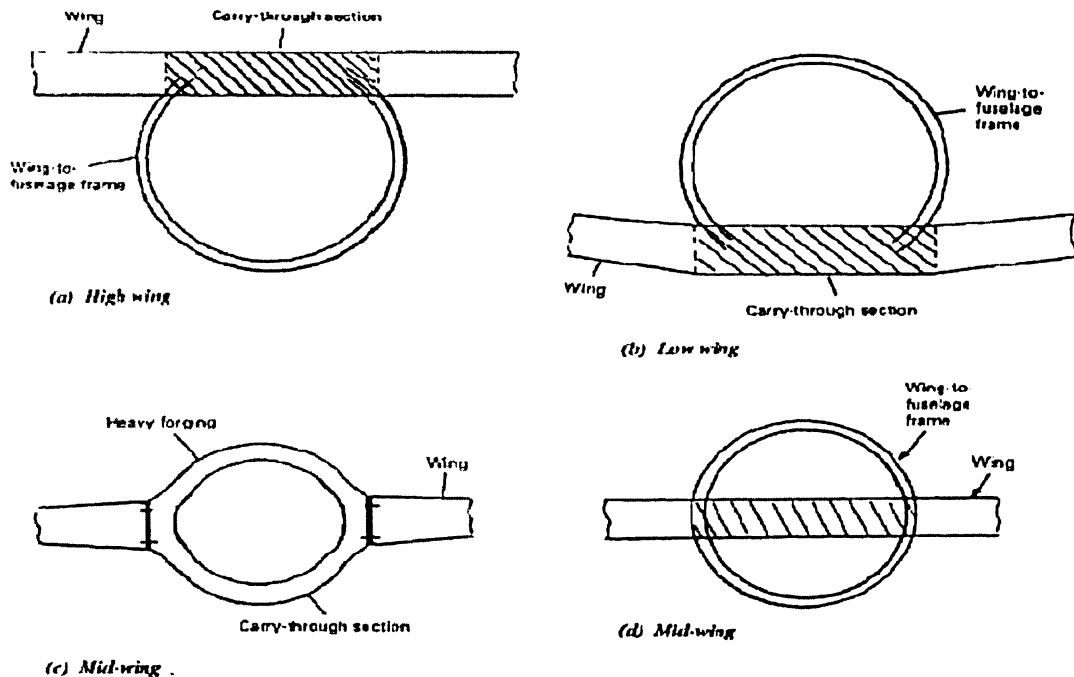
Wing-fuselage intersection (carry-through section) [5, p. 406]
